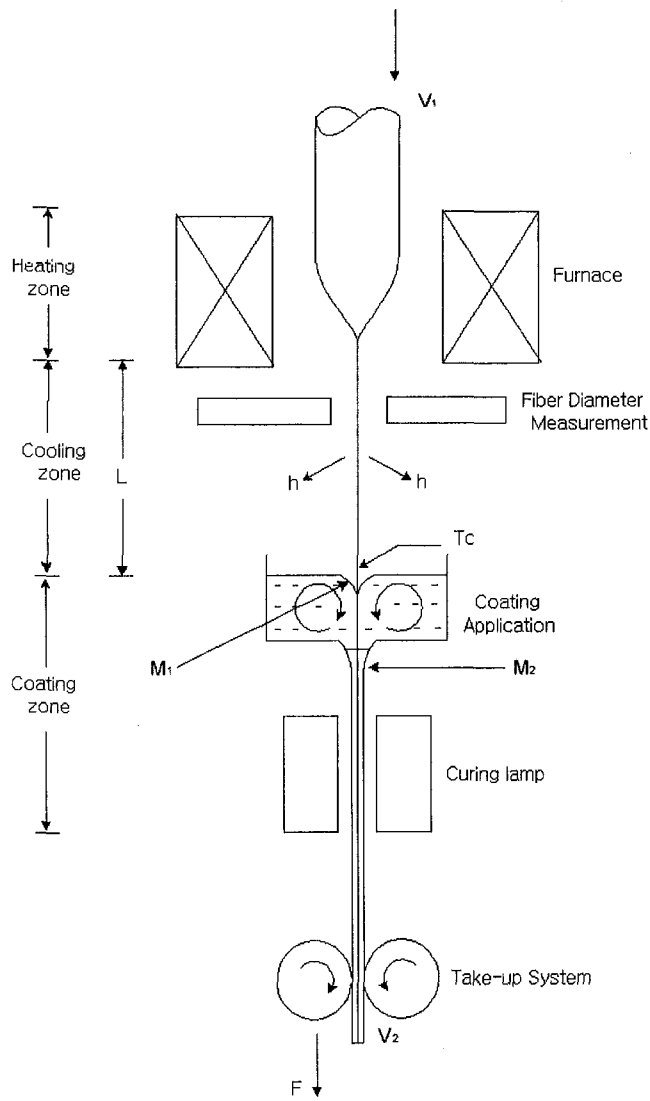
Schematic of high-speed drawing and coating showing heating zone, fiber cooling zone, and coating zone
